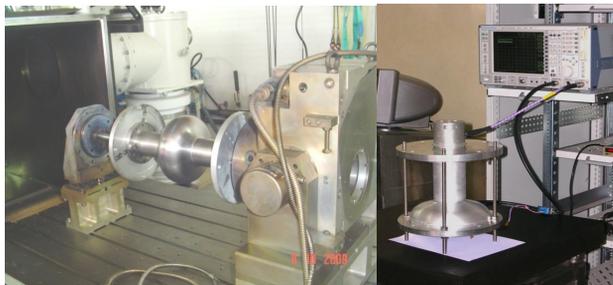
a) Electron beam welding setup and b) RF measurement of welded half cell assembly.
